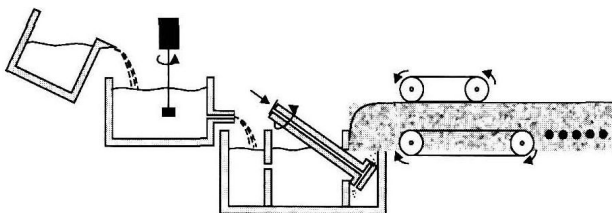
The foam casting process employed by CYMAT for producing flat panels consists of melting and holding furnaces, the foaming box and foaming equipment, and a twin-belt caster [2][3].
